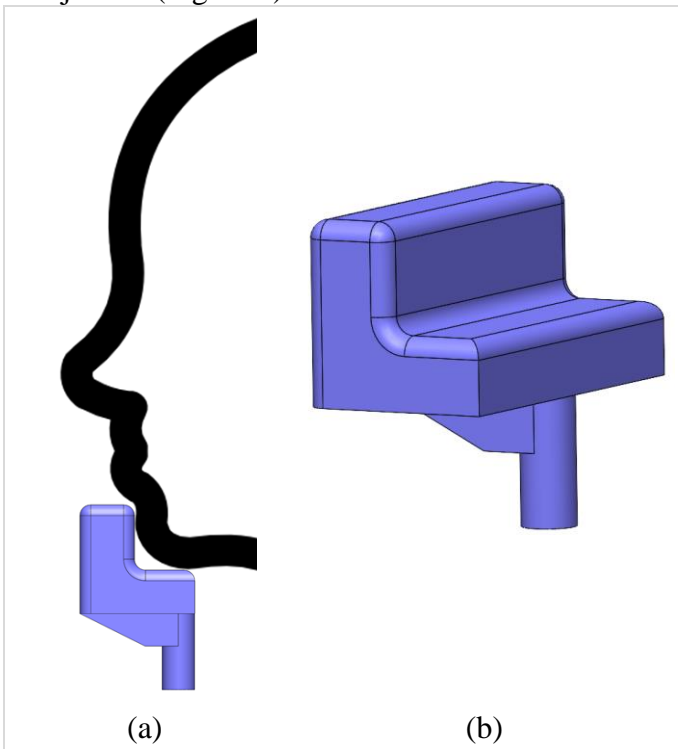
Chin Attachment: a- Right View and Ideal Positioning; b – Isometric View of the Chin Attachment
